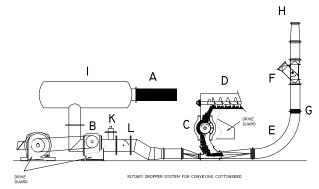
Rotary dropper system for conveying cottonseed. A, Steel mesh air filter, or screen box; B, Rotary positive-pressure blower; C, Rotary dropper, or vacuum-wheel feeder, with eight or more shallow pockets; D, Gin stand steel screw conveyor 9- to 24-in (22.9-61 cm) diameter depending on plant capacity; E, Long-sweep large-radius elbow; F, Valve for diverting seed to bin or storage; G, Pipe flange and gasket; H, Discharge connection (shown as reducer to accelerate seed when loading vans or box cars. Can be inverted for wider coverage); I, Inlet silencer or muffler; K, Blower discharge pressure relief valve, typically 4 to 6 psi (27.6-41.4 kpa); L, Optional swing-type check valve to prevent material from back-flowing into blower when there is an up-stream blockage.
